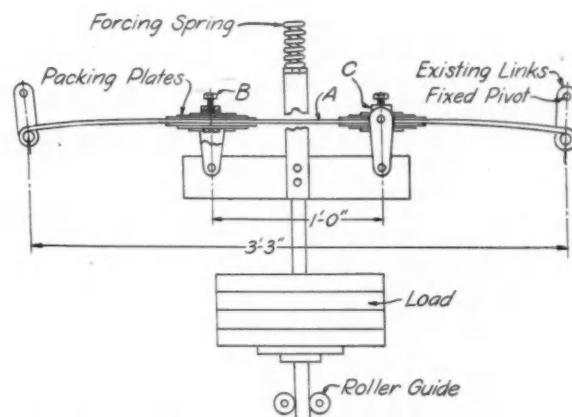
Machine for testing single leaf of laminated spring + + + + +
